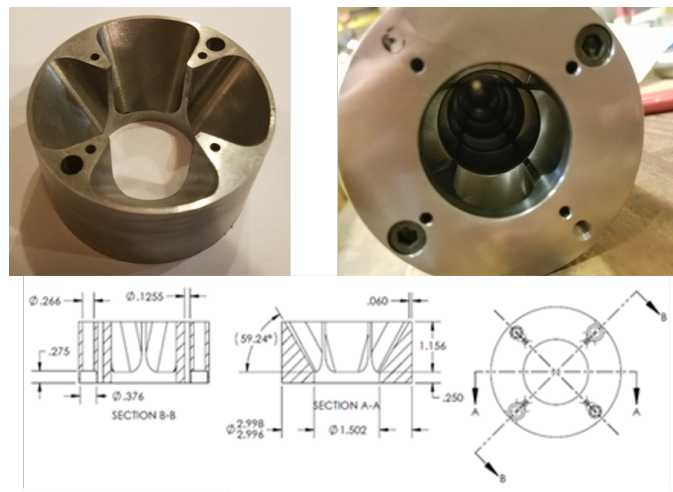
Photo of slanted baffle chamber insert and machine drawing
